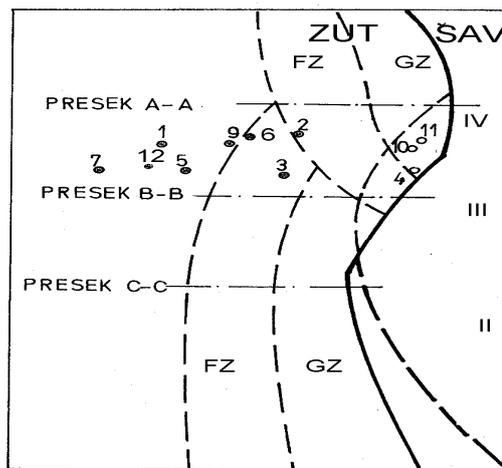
Locations of crack tip in the welded joint. Slika 4. Položaji vrha prsline u zavarenom spoju
